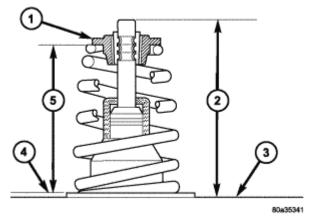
Identifying Spring Compressor & Adapter Courtesy of CHRYSLER LLC
